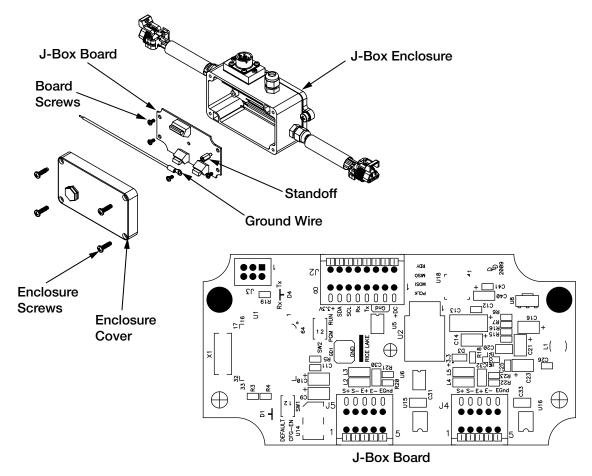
Board Removal and Wiring – Quick Connect Style
